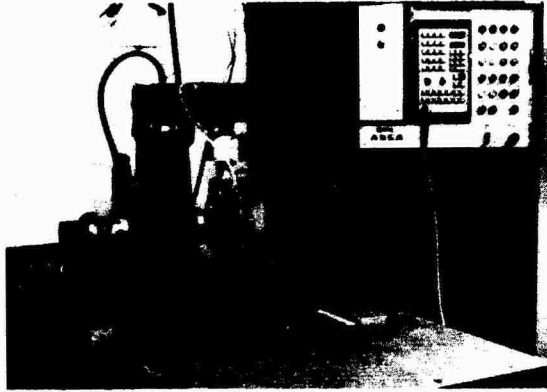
ASEA IRb-6 Robot, Six Axis Force Sensor and Sixth Axis Spindle Drive System
